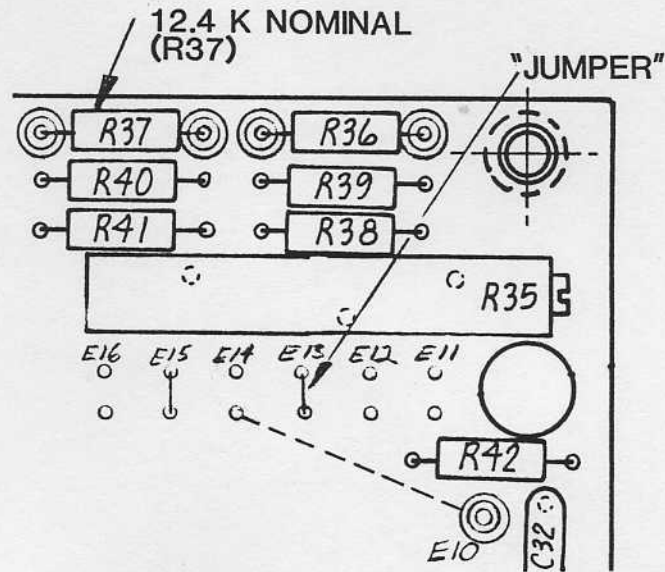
Location of Frequency Correction Compensation Jumpers on Synthesizer Board Assembly.
